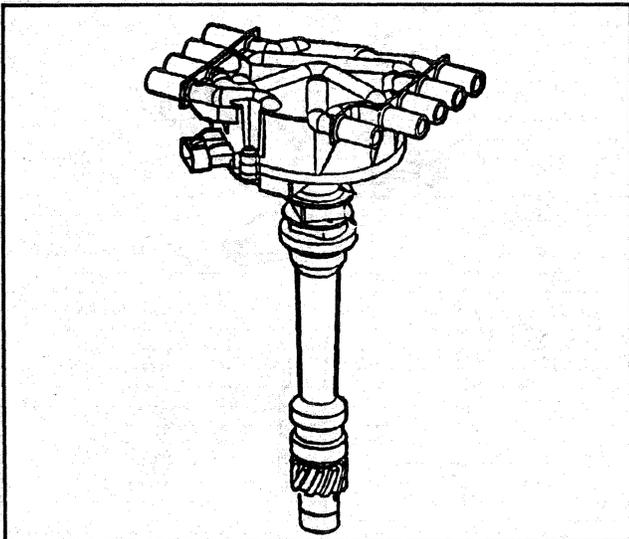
Distributor (5.0L, 5.7L and 7.4L)
